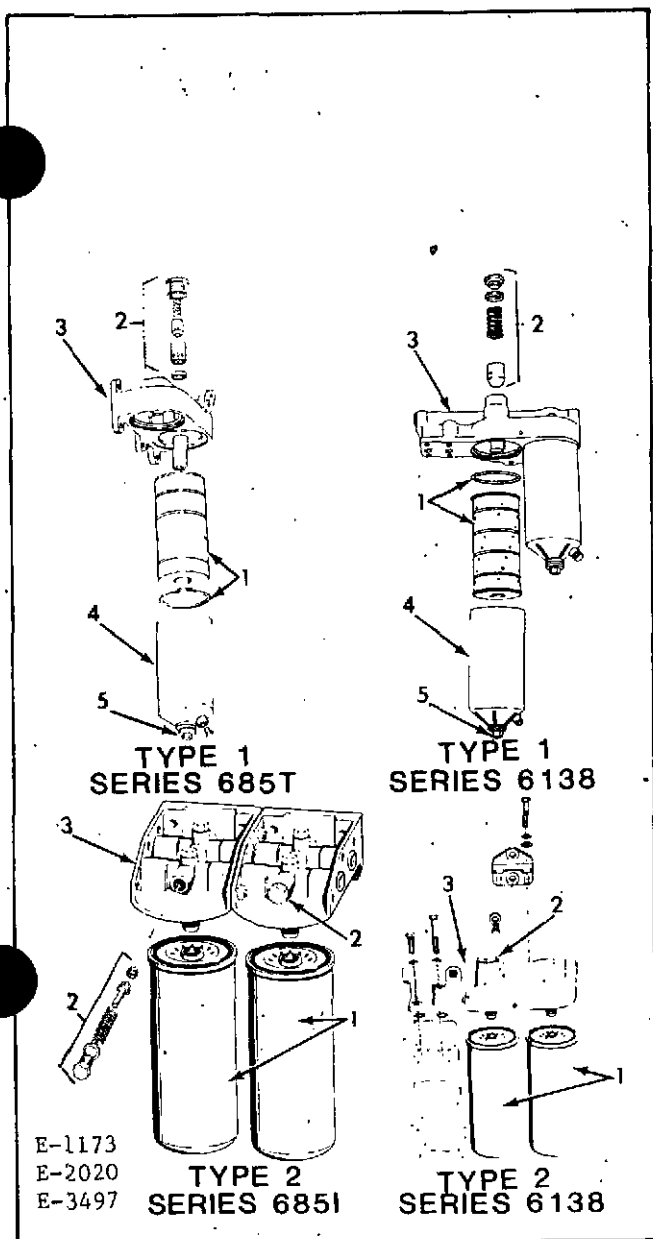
Series 685 and 6138 Engines For Engines with Dry Exhaust Manifolds
